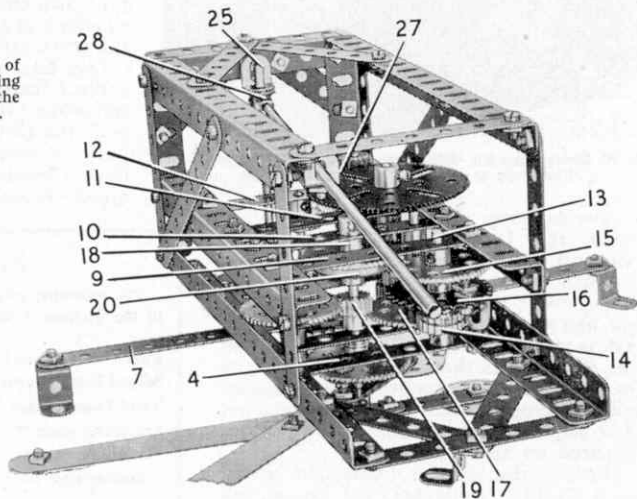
(above). A side view of the clock mechanism revealing details of the frame and the bearings for the gear shafts.
